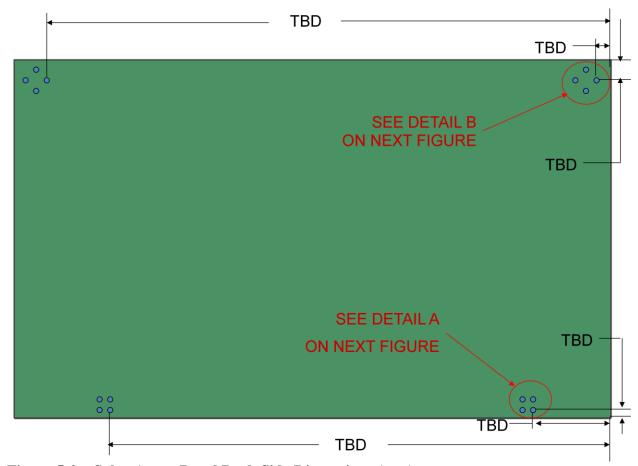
Solar Array Panel Back Side Dimensions (mm)
